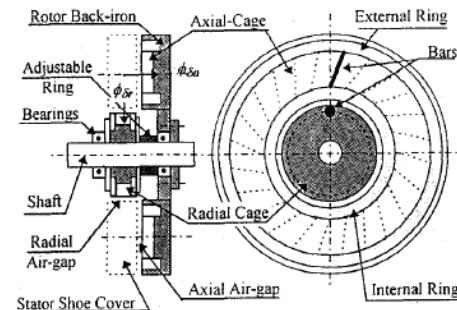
Schematic views of the rotor of the double air gap (Axial and radial air gap) motor [14]
